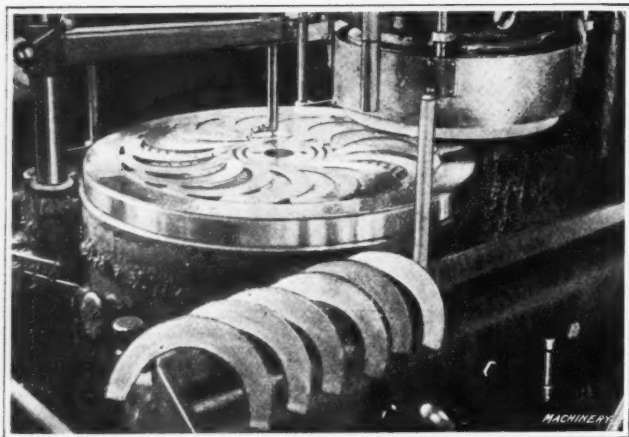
Method of holding and grinding Micrometer Frames on Blanchard Vertical Surface Grinder
